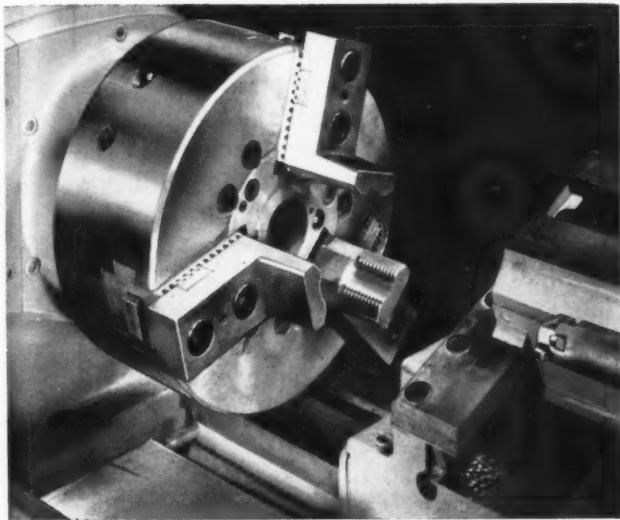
Close-up view of the air-operated chuck used to hold the bushing for rough- and finish-boring and facing of one end. Both boring tools are visible in the boring-bar at the right
